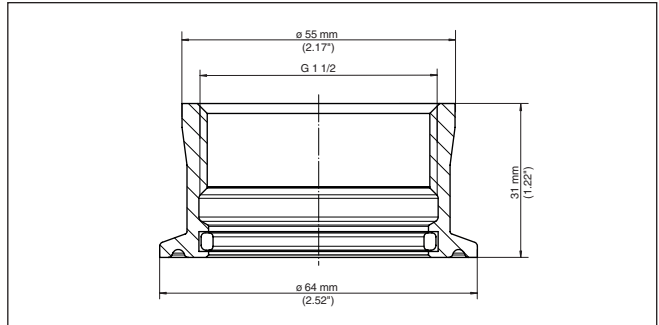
Dimensions of threaded adapter G1½ (DIN 3852-X) on Clamp 2" (DIN 32676, ISO 2852) PN 16
